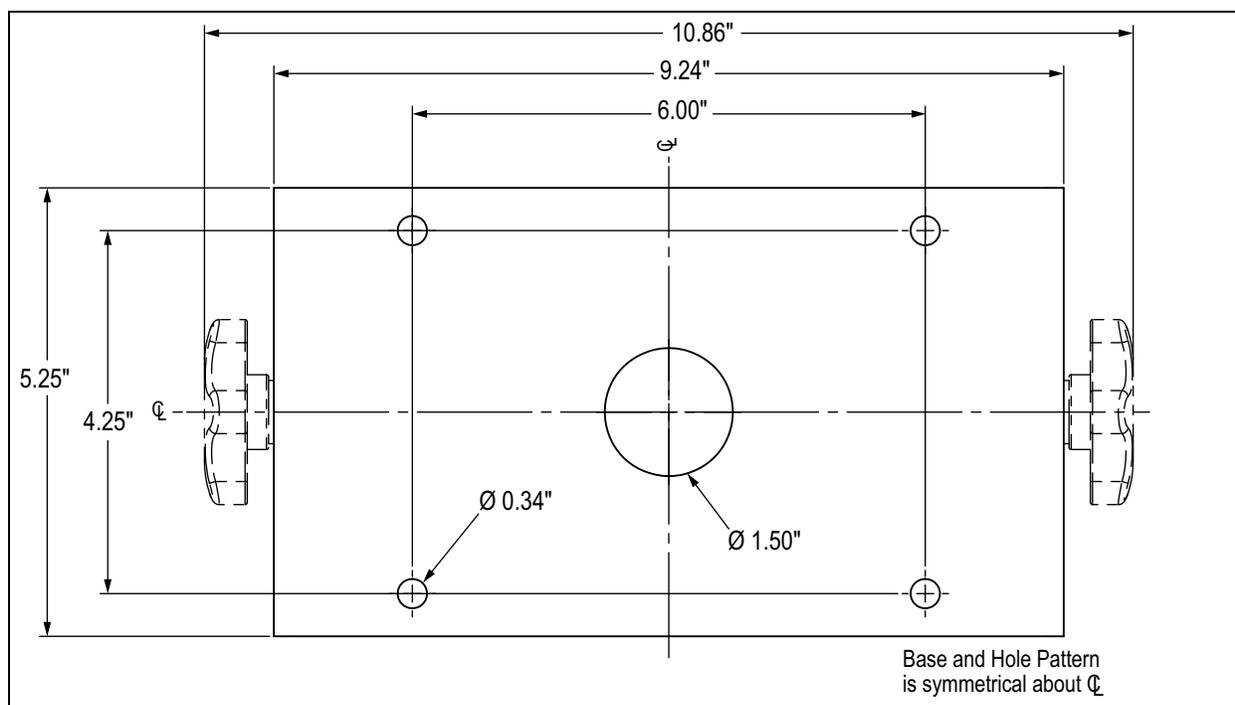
Universal Tilt Stand Hole Pattern Dimensions
